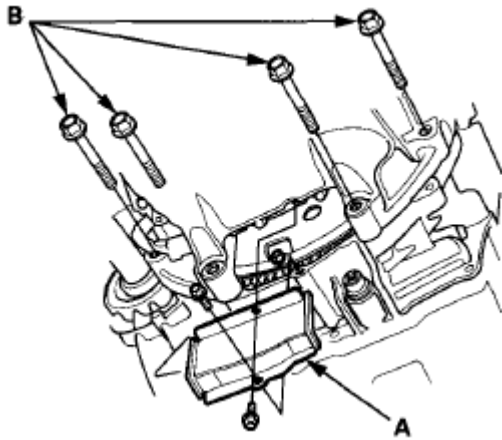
Identifying Torque Converter Case Cover And Bolts
